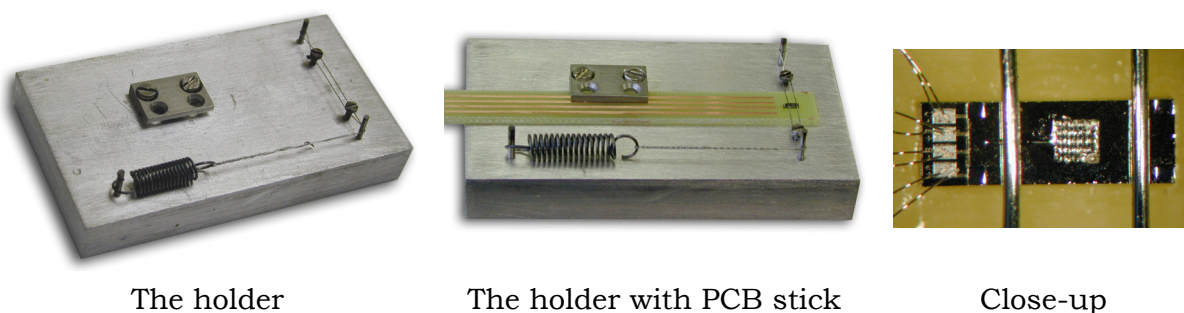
Pictures of the special tool used for the sensor assembly.
